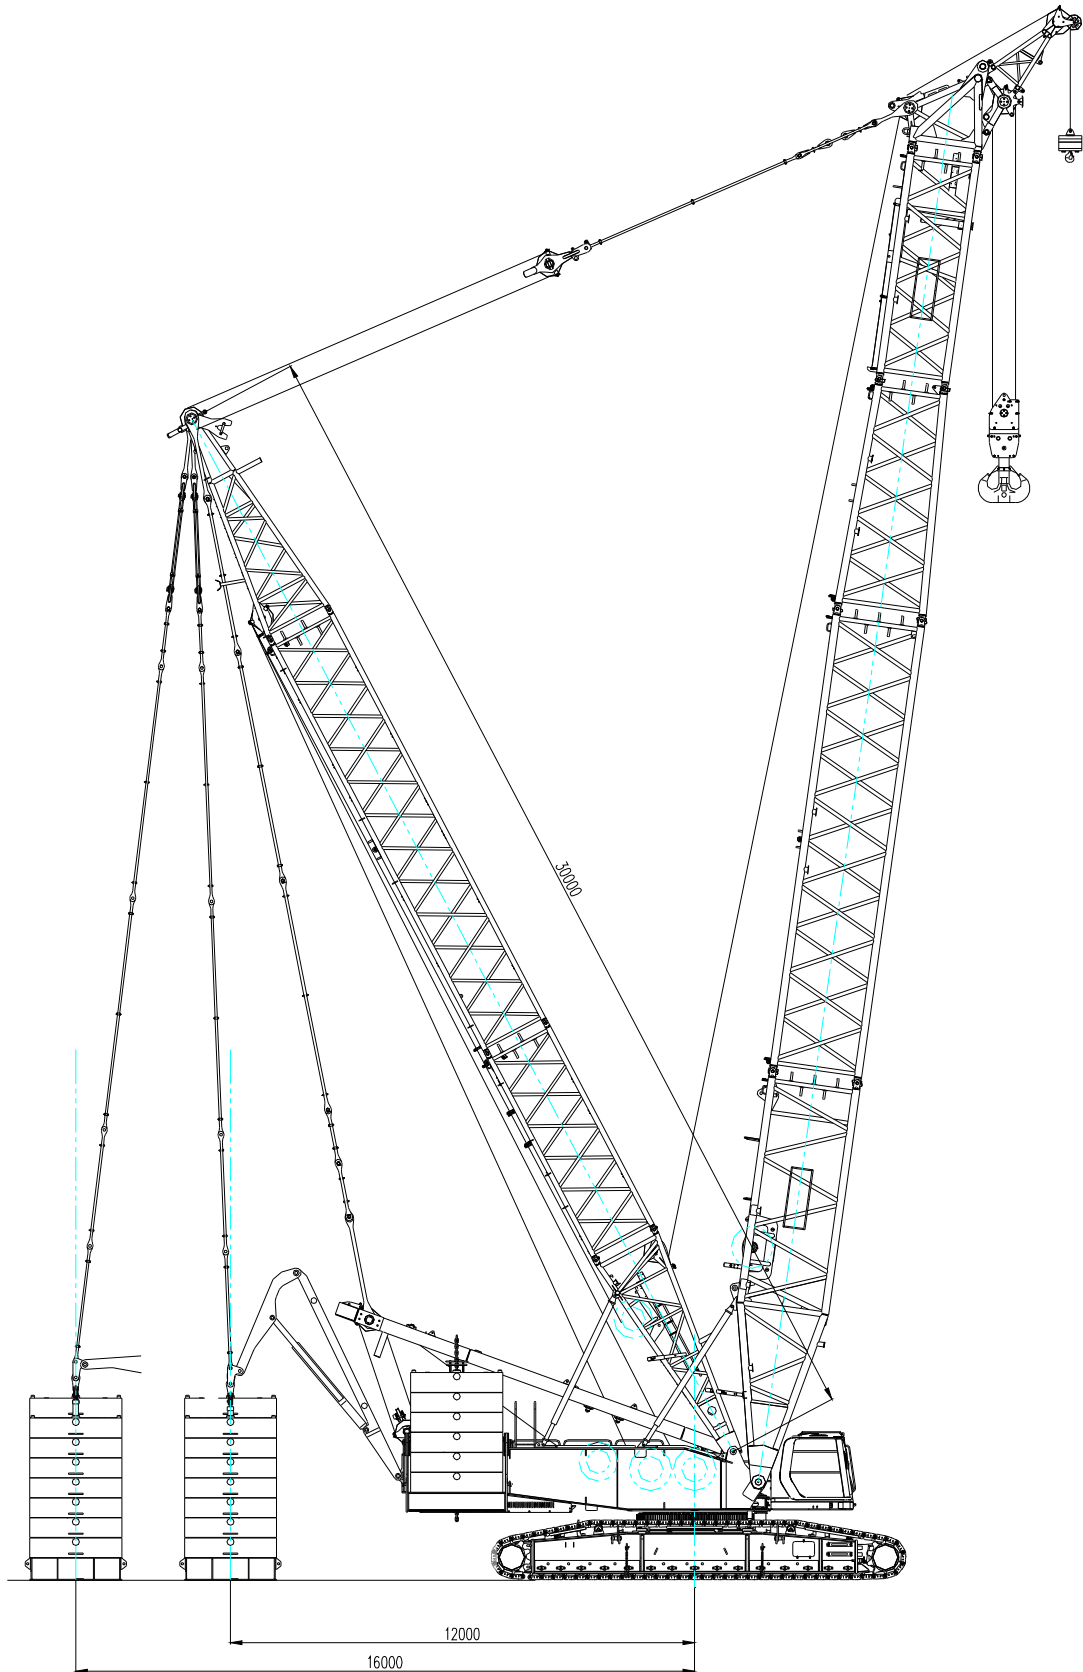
XGC400-I crawler crane outline dimension (superlift working condition)
